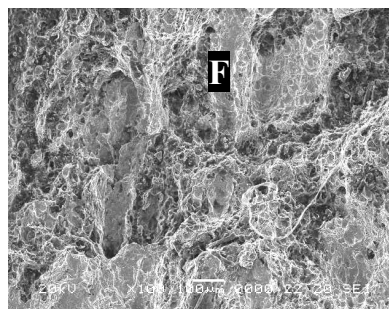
Fracture Morphology of As welded specimen in the HAZ region with Fringers (F)
